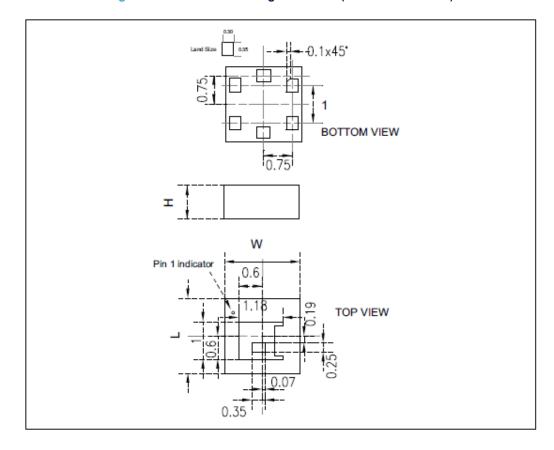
Mechanical drawing of HTS221 (dimensions in mm)
